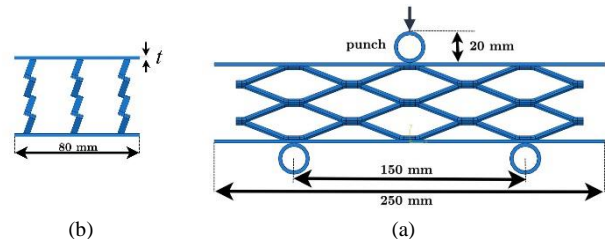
A schematic view of the sandwich beam sample a) front view and b) side view
